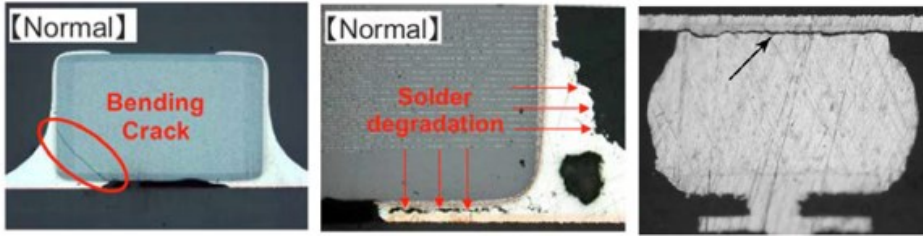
Sample failure types of a surface mount component – bending crack, solder degradation and ball grid array solder failure.
